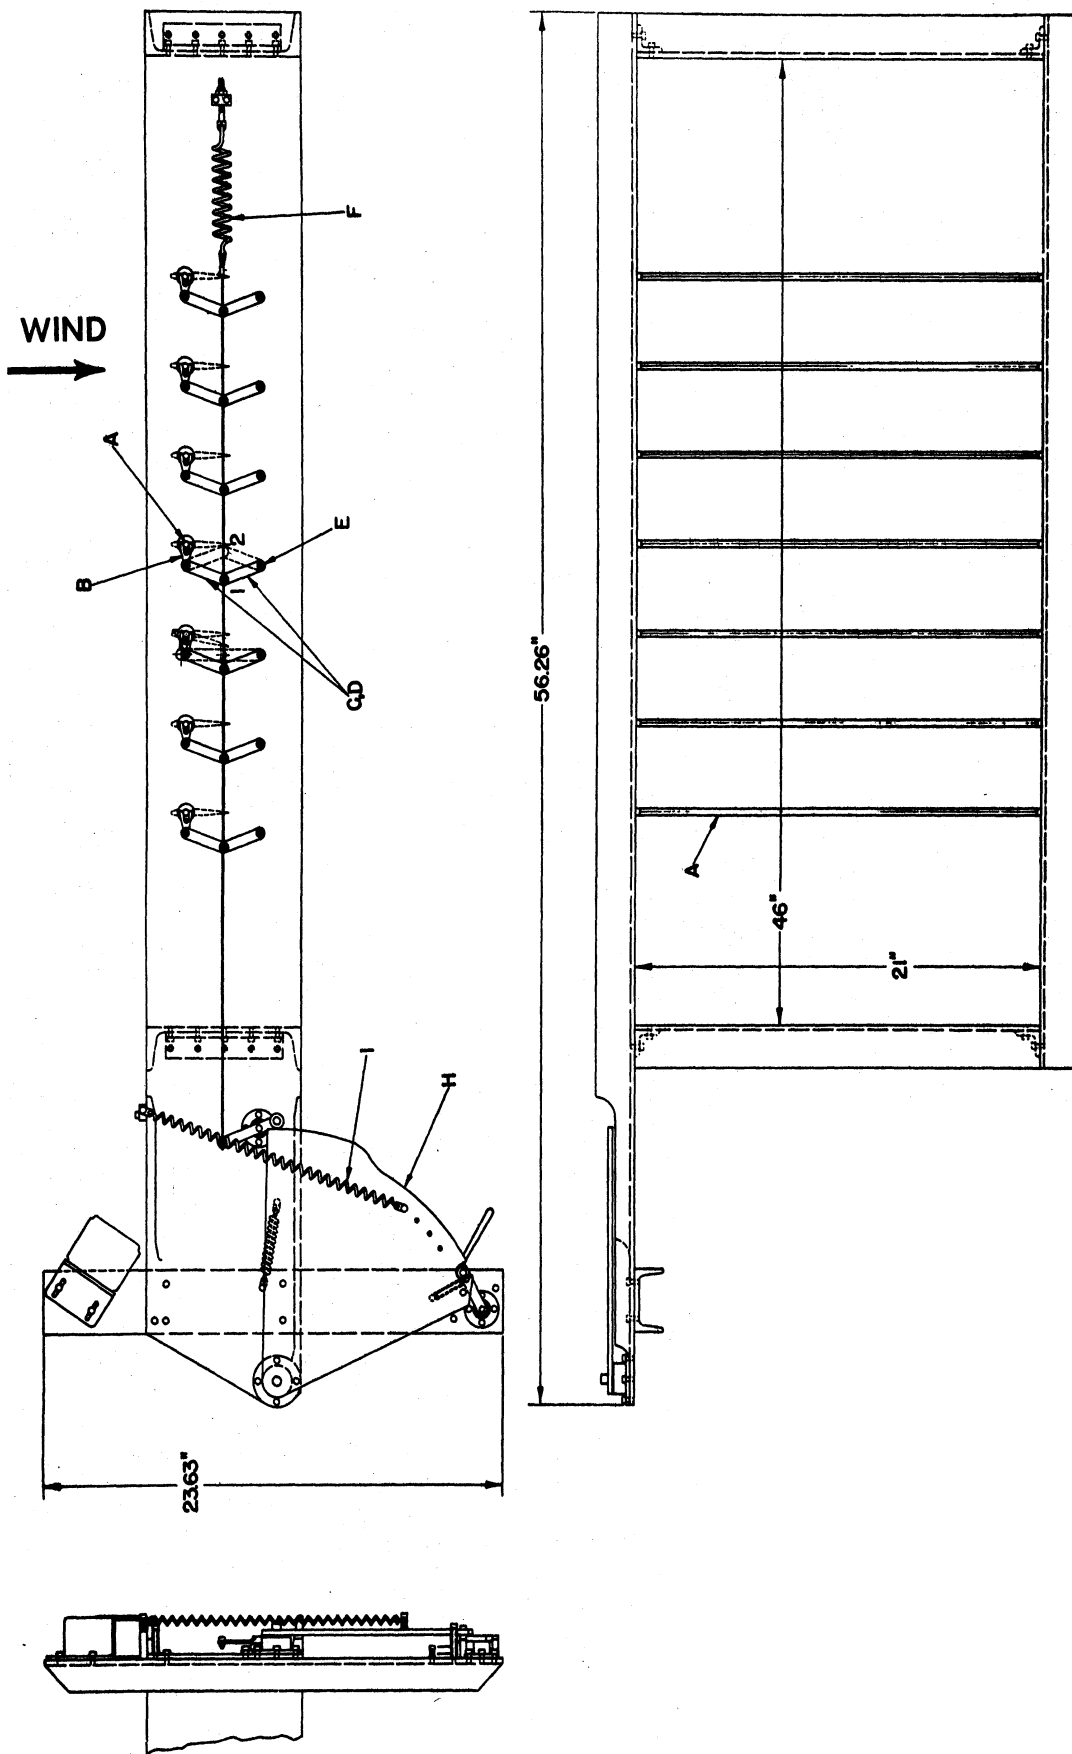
Schematic drawing of Vortex Gust Generator mechanism.
